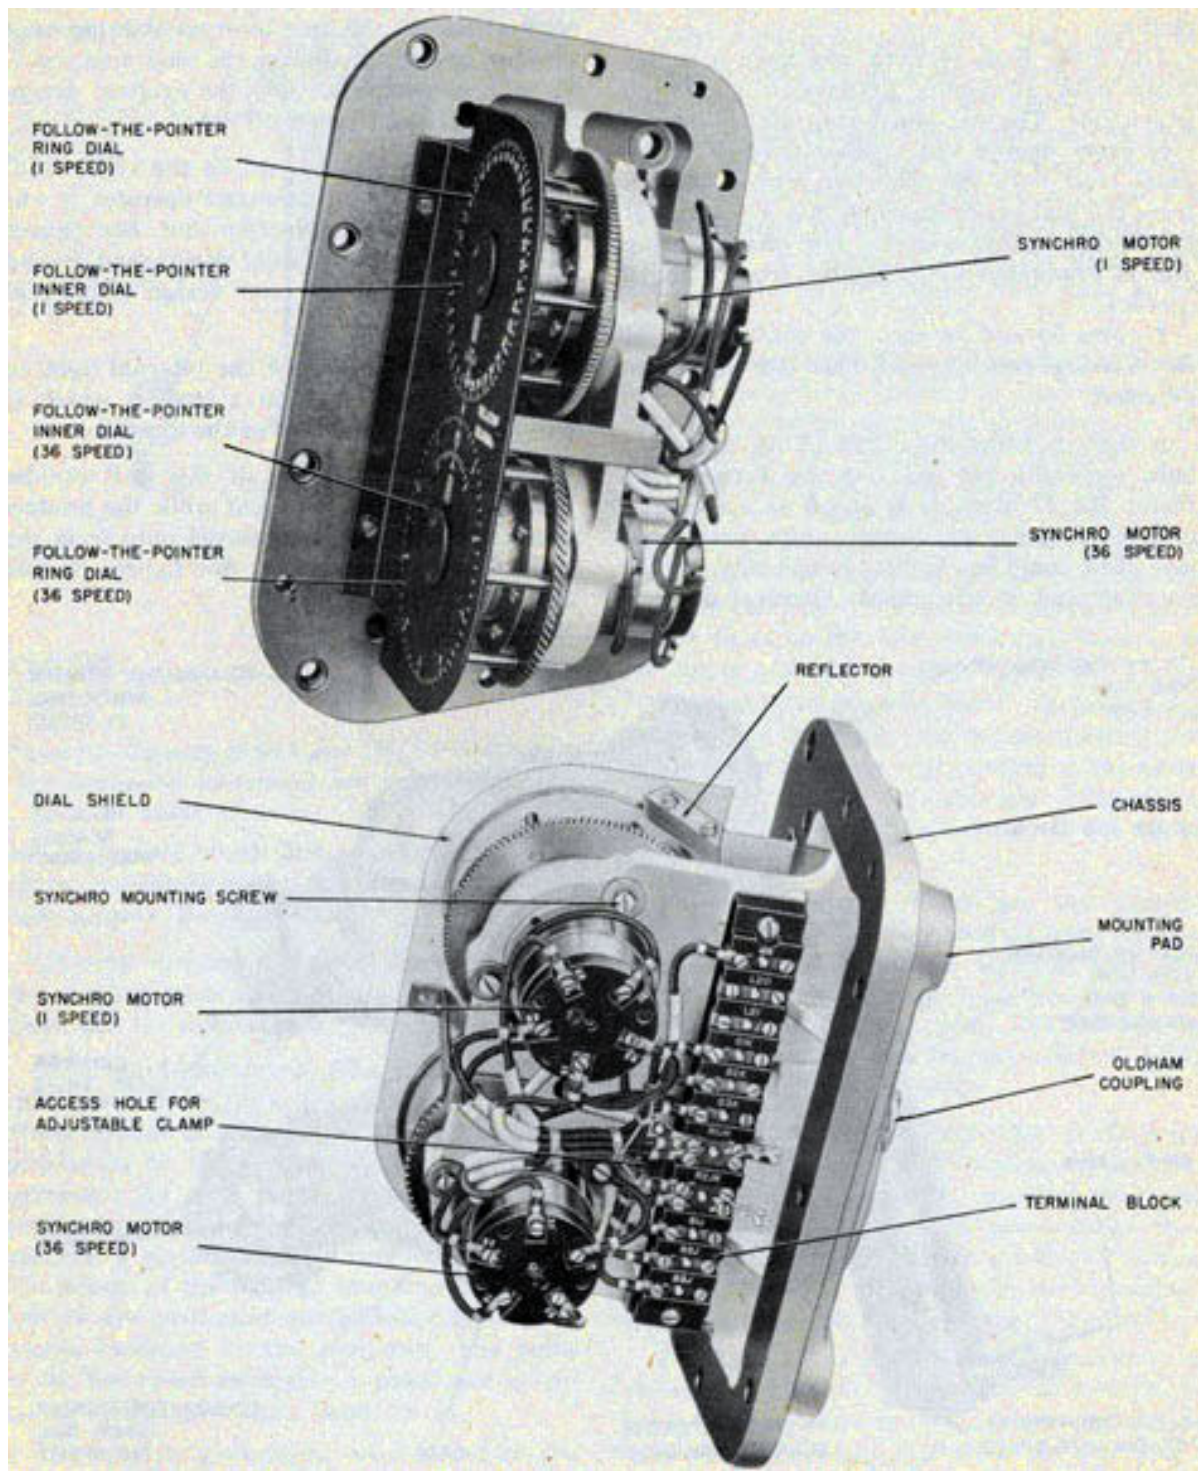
Right side and rear view of external lighting type bearing receive; showing terminal block and wiring connections.
